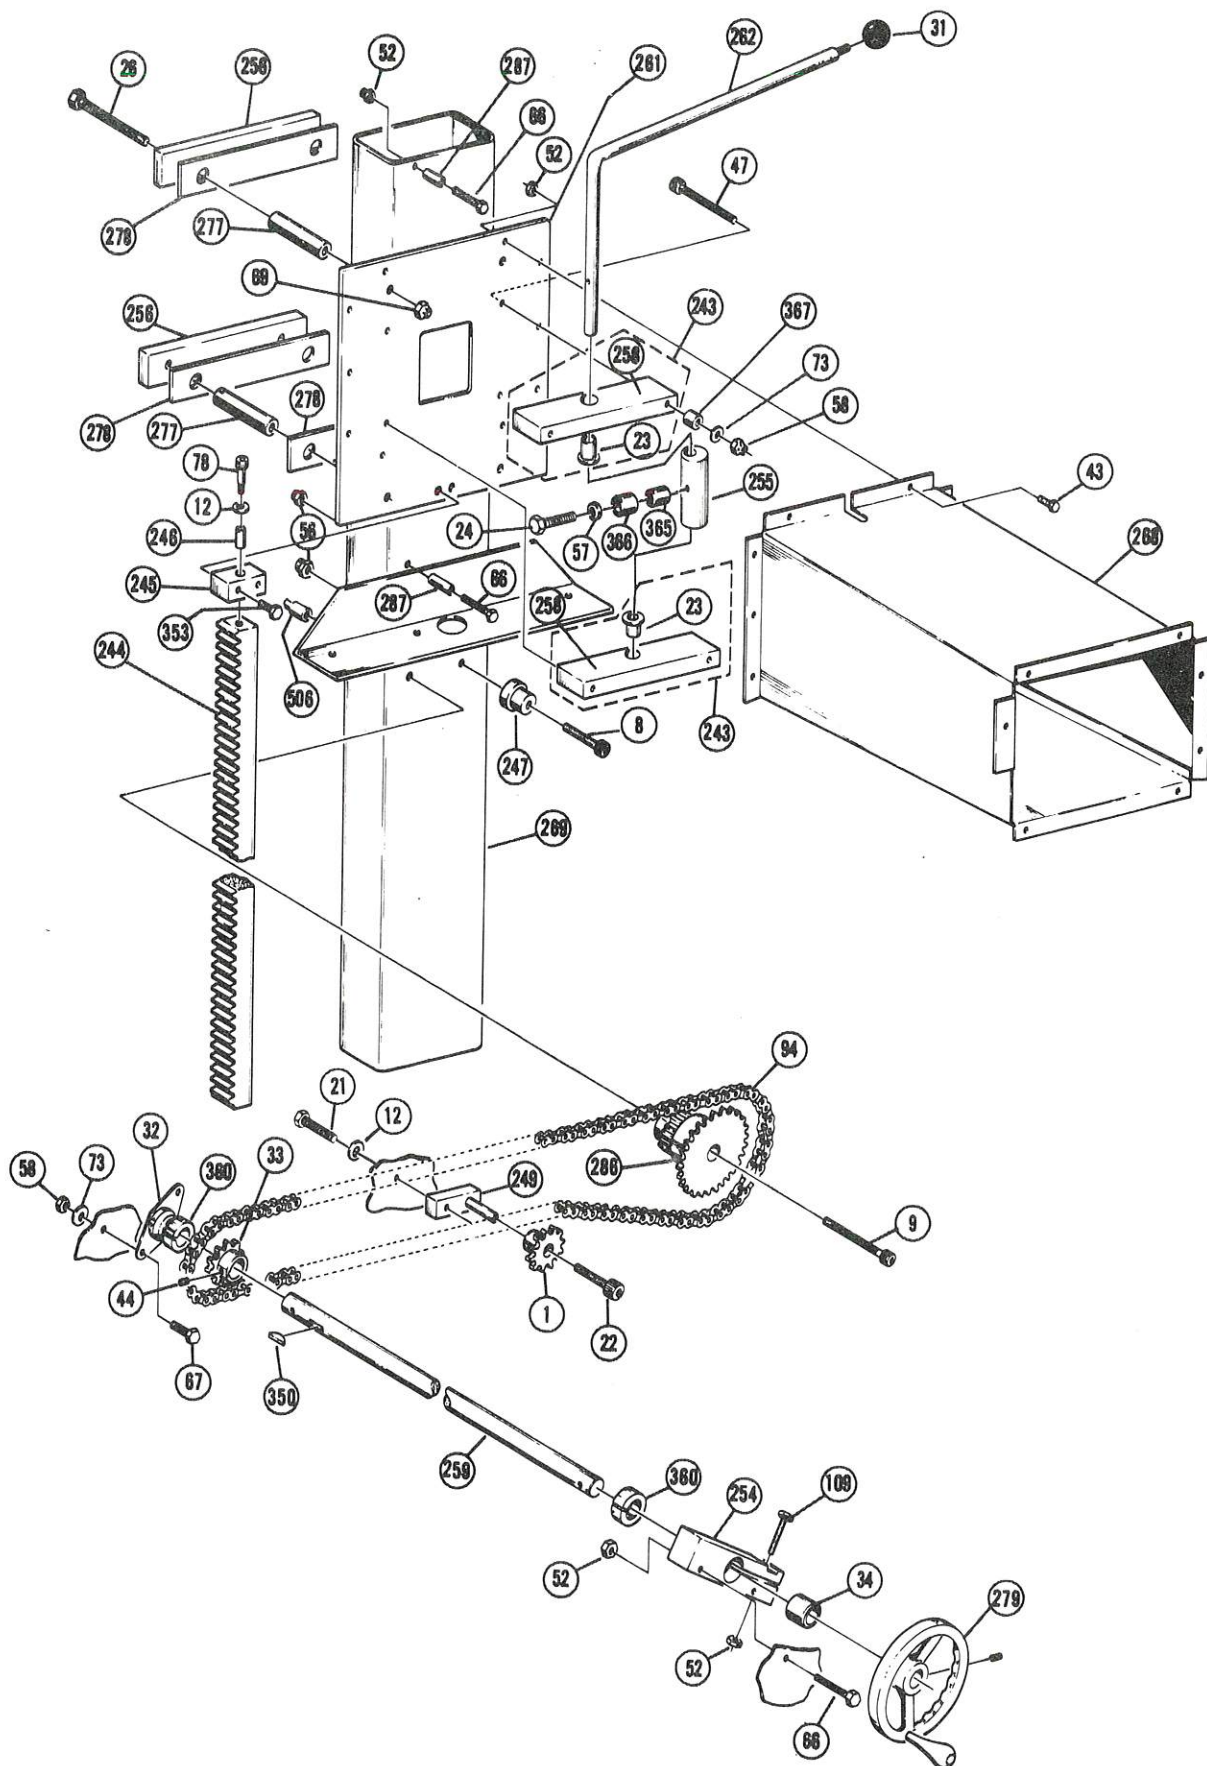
MAST ASSEMBLY AND BOX HEIGHT DRIVE ASSEMBLY
